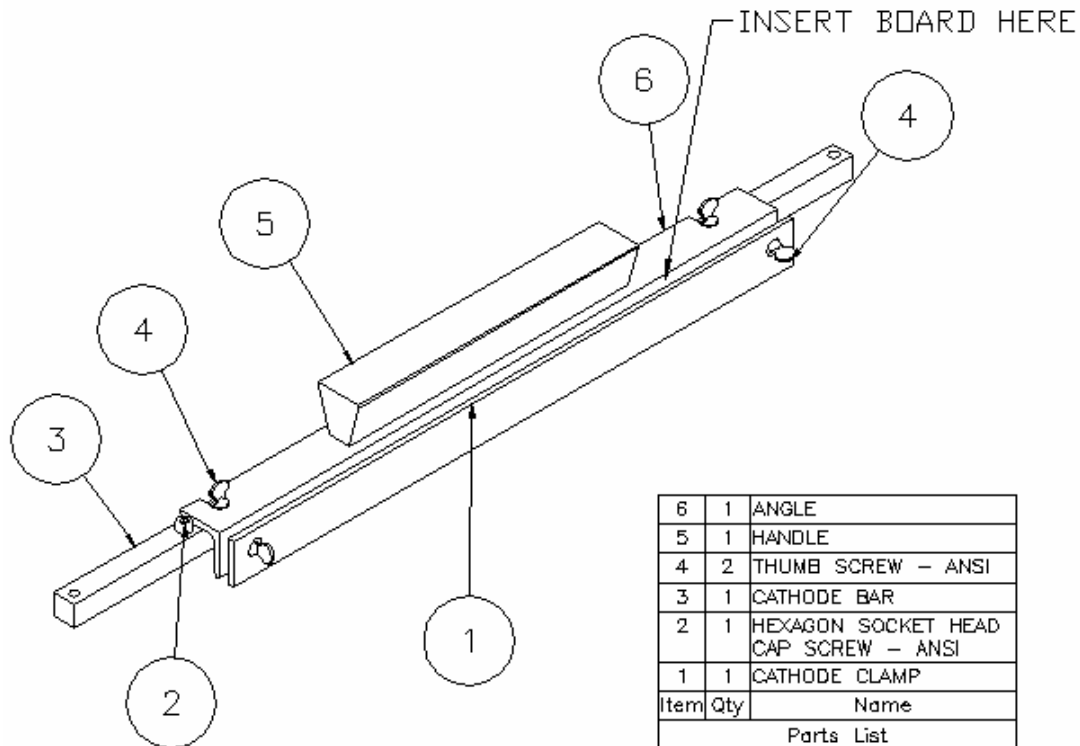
Handle Assembly (QP-1812) mounted on cathode bar.
